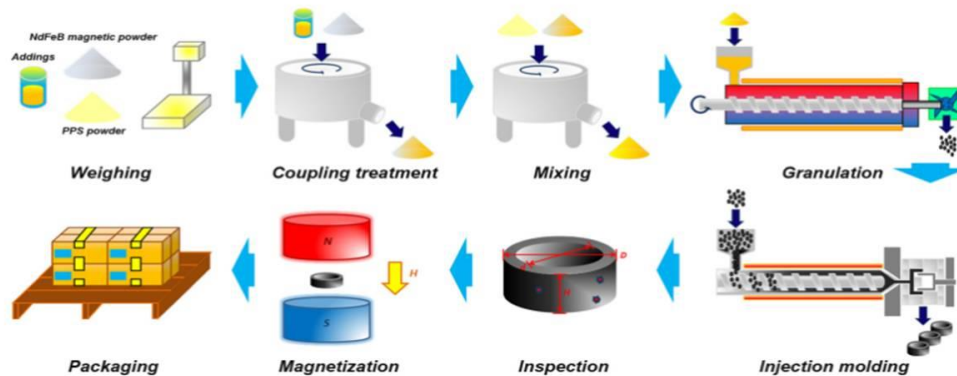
Traditional process steps for making injection bonded NdFeB magnet [85]
